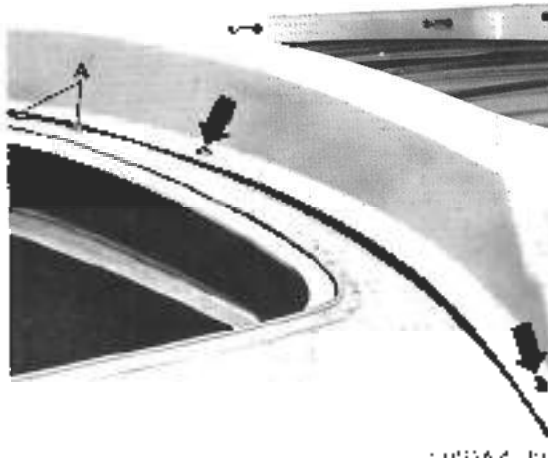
Screws at front edge of luggage rack. Arrows indicate two of the four Phillips head screws. There are two rubber spacer washers at A. Two plastic caps must be pried off for access to the two center screws.
